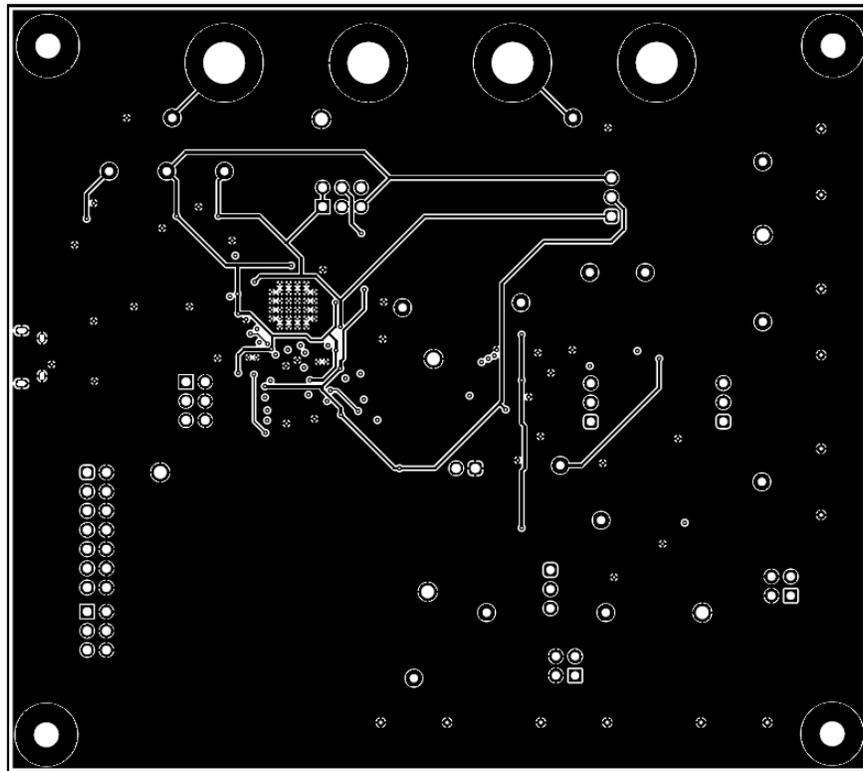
AFE881H1EVM PCB Mid Layer 2 Layout (GND Pour with Signal Routing)
